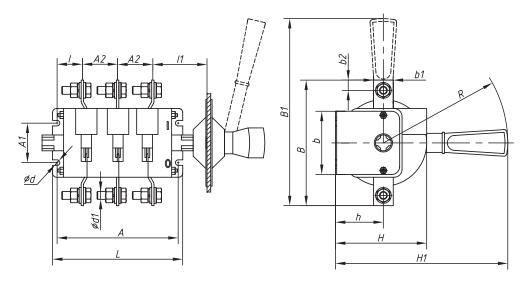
Universal switch disconnector 3-poles for one direction with arc chutes, detachable left/right handle
